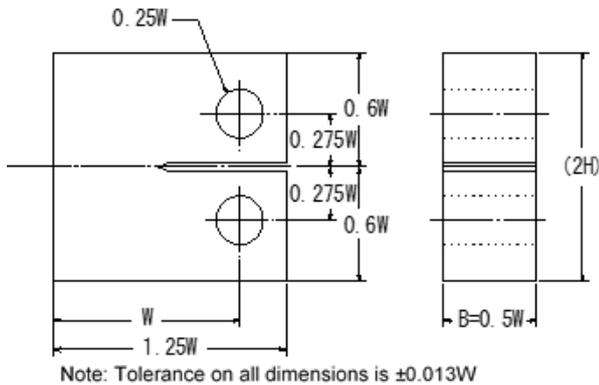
Geometry and dimensions of C(T) specimen in ASTM E1921[1].
